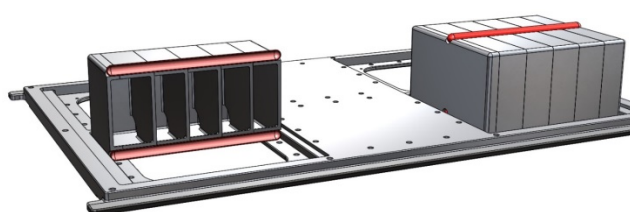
PCM-TA interior view, showing a stack up of five sections on a 6U base plate.
